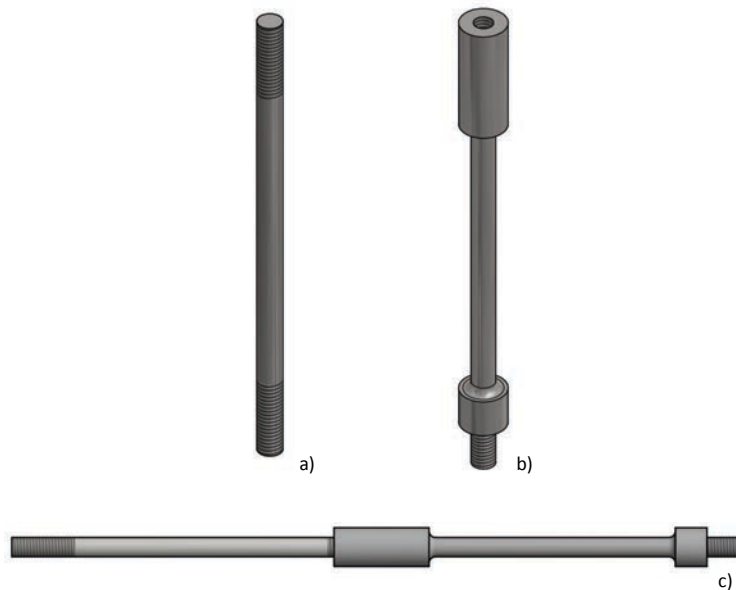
Holding rods a): upper part; b) bottom part; c) complete holding rod
